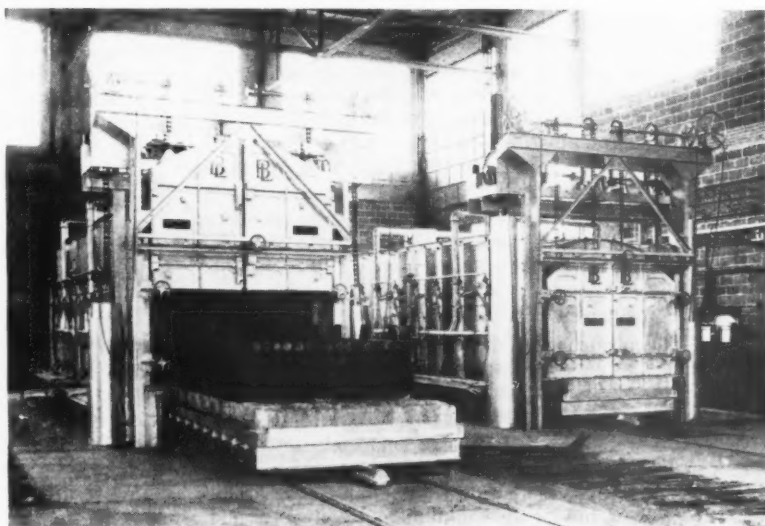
Car-type annealing furnaces for bar stock showing method of racking to insure uniform heating throughout the load by circulation of gases through bars.
